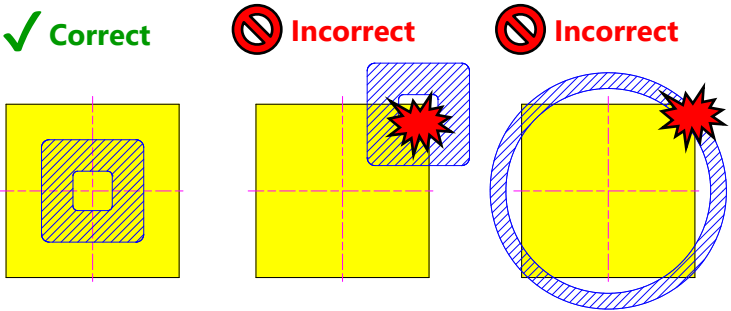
Examples of Correct/Incorrect Nozzle Dimensions
